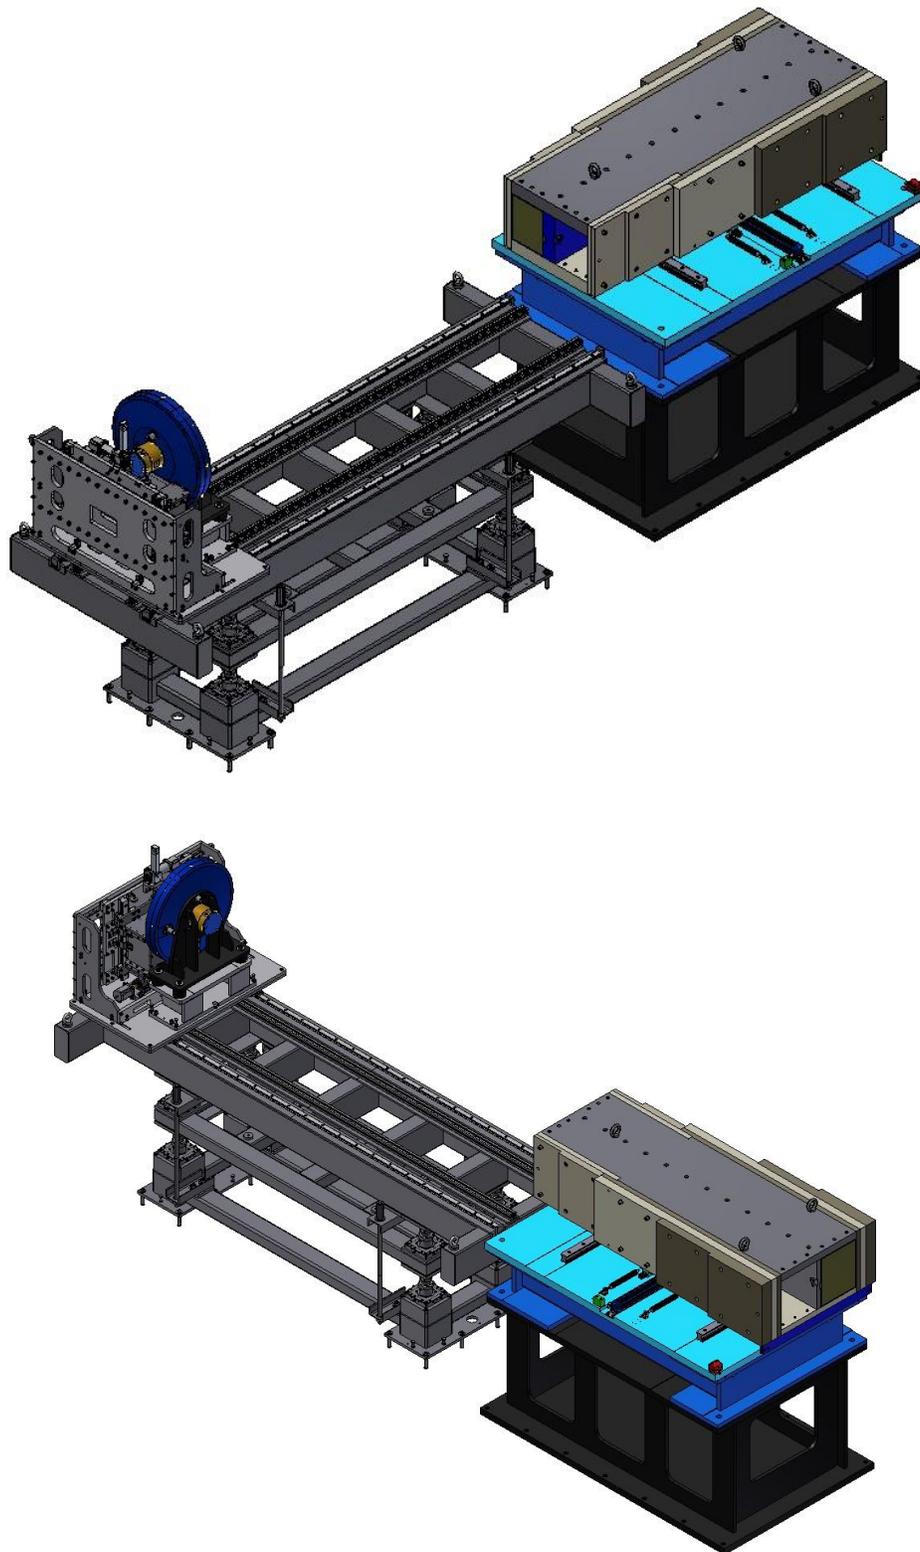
Aerial view of test beamline components with heavy shutter in open position.
